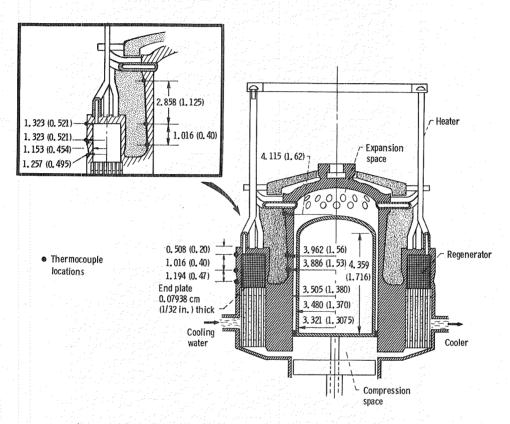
Schematic showing dimensions needed for calculating heat conduction. (Regenerator housings, cylinder, and displacer are 310 stainless steel. Dimensions are in cm (in.).)
